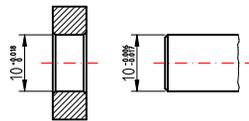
Dimension labels often indicate manufacturing tolerances.
